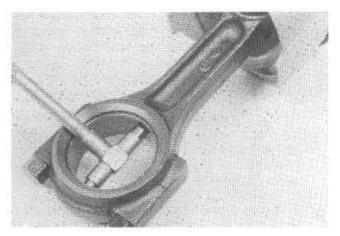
Measuring Rod Bearing Inside Diameter (torqued)
